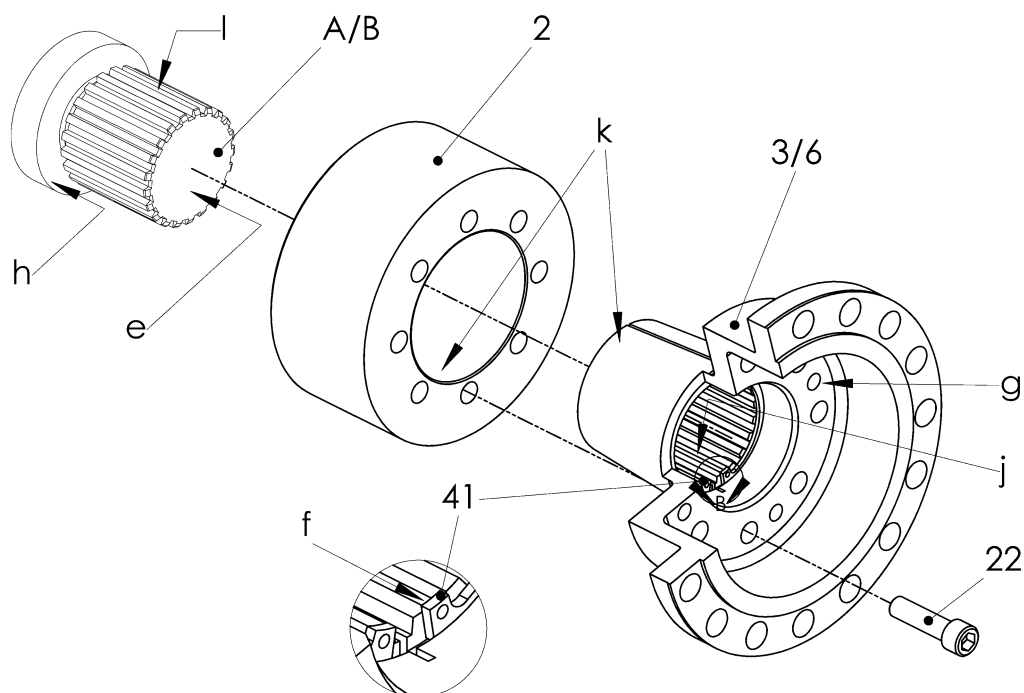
Mounting the CENTA conical clamping hub (3)
